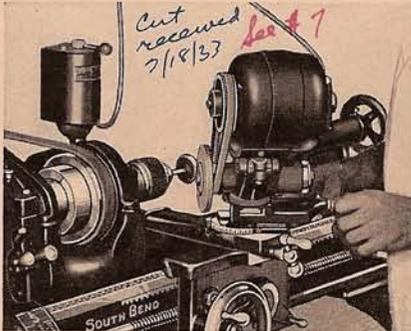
Grinding a Valve Face in the Auto Shop Lathe, using Electric Valve Grinder.
